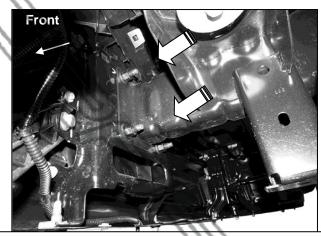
Remove plastic blocks from below headlight and from below grille (Fig 4)
